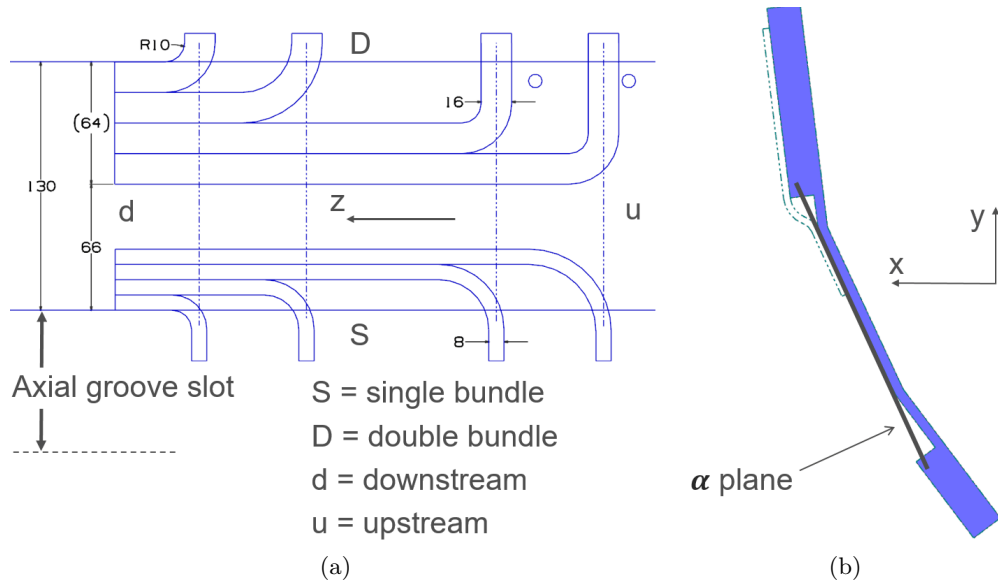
Cables layout for two stations (α plane view) (a) and position of α plane (b).
